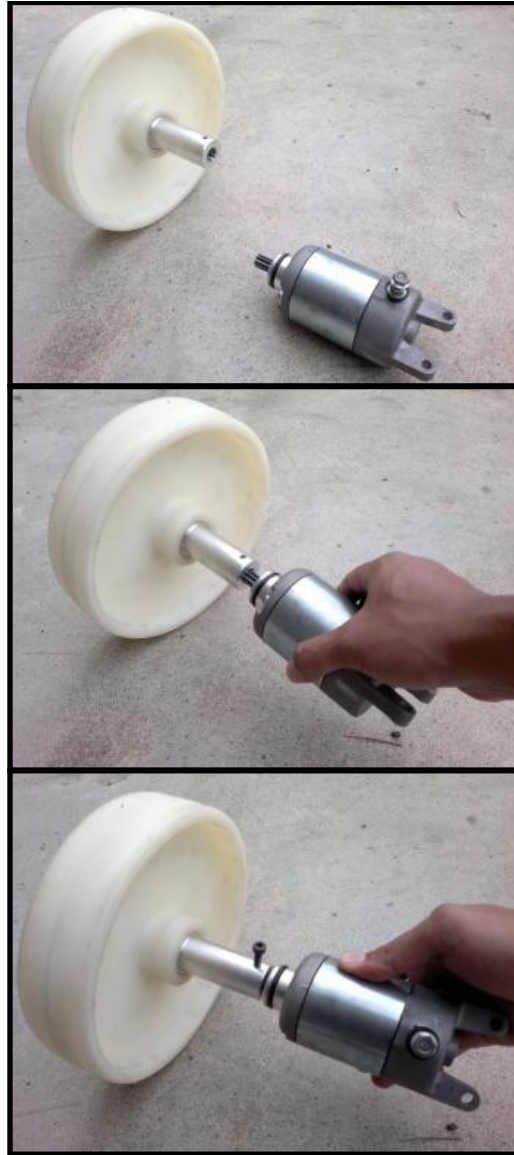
Assembly of aluminum rods, rollers and motor starter
